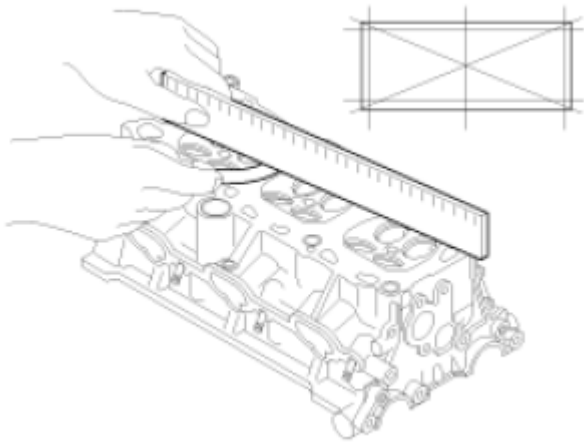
Measuring Surface Contacting Cylinder Block And Manifolds For Warpage
